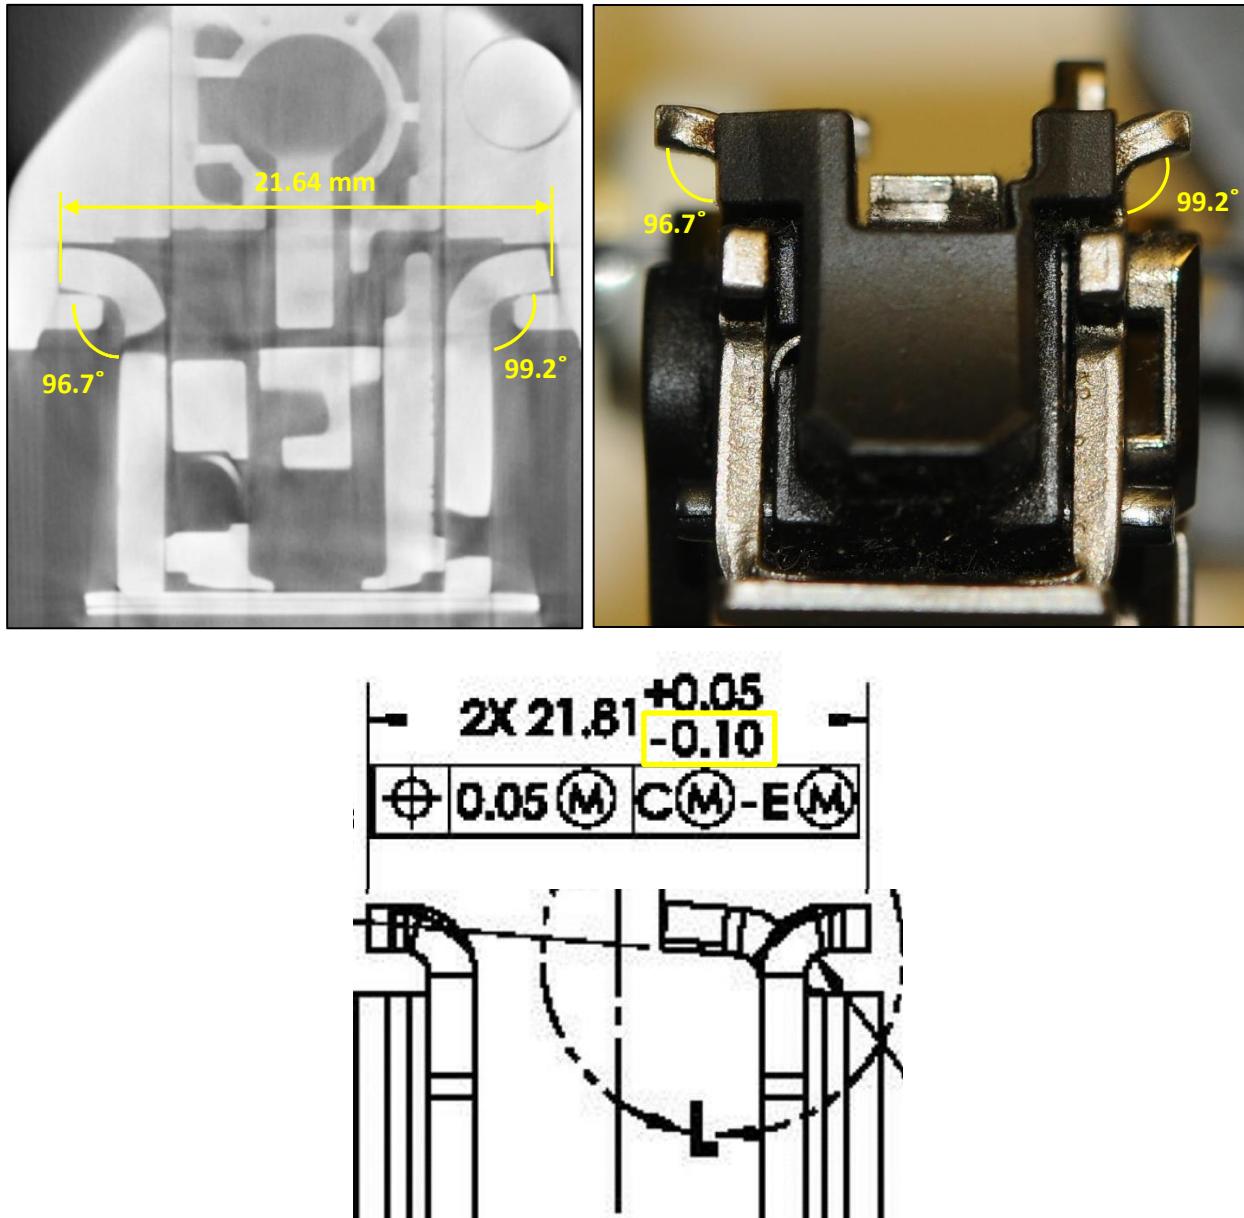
CT scan showing receiver frame distortion (upper left), photograph of the same area (upper right), and image from Sig Sauer drawing #1301552
